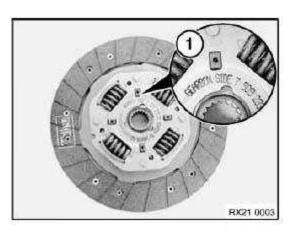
Mark On Gearbox Side For Transmission Side Of Clutch Plate Courtesy of BMW OF NORTH AMERICA, INC.
